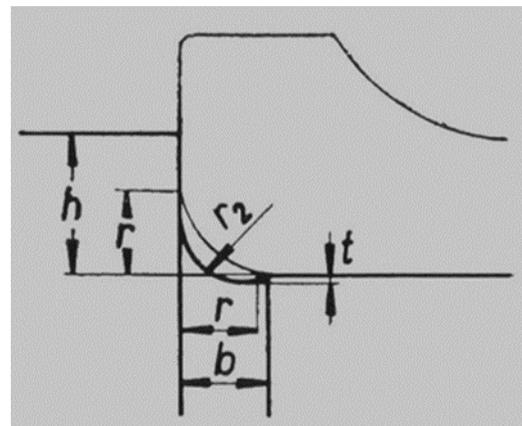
Transfer between the journal and the fitting front formed by the recess
